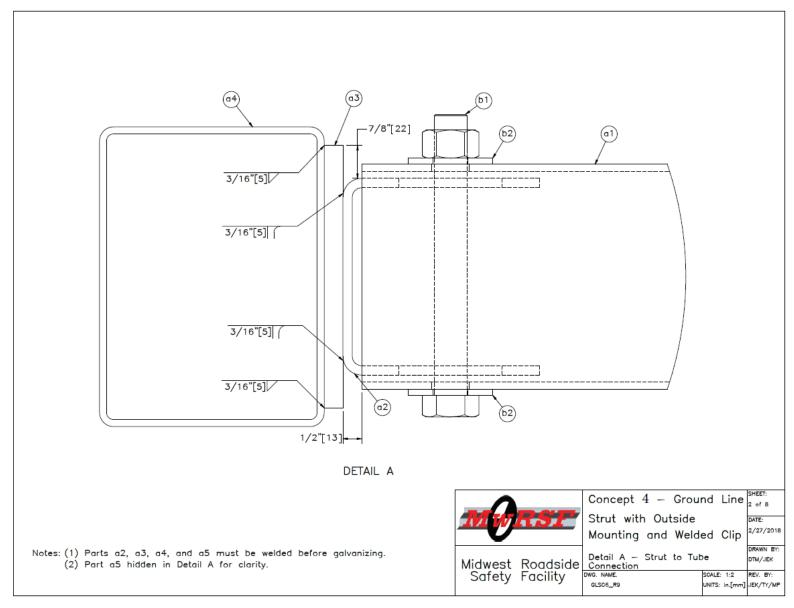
Ground Line Strut Concept No. 4 – Strut to Tube Connection
